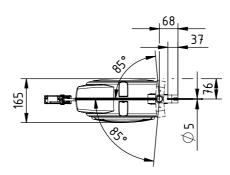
Aluminum cable rewinder type 601KR/DW type 601KR/EW
